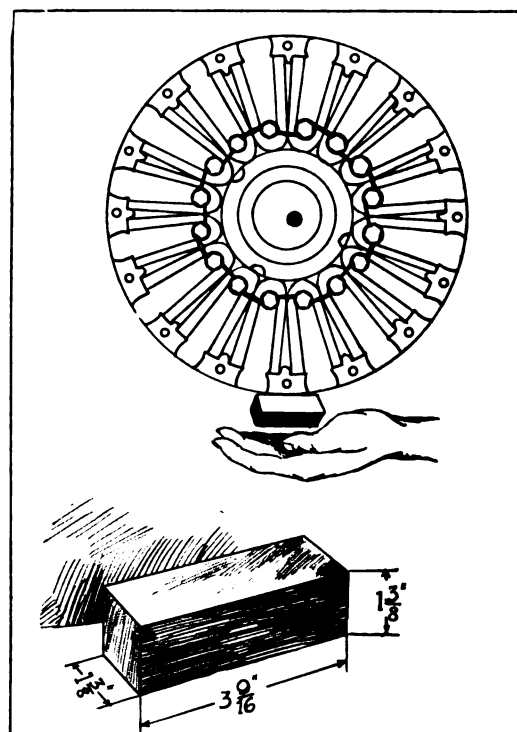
The steel block should just hang in place. The block should be the weight of the Ford camshaft gear
